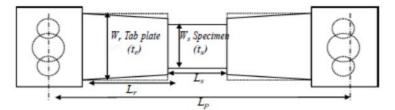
Conceptual view of test specimen, tab and load jig
